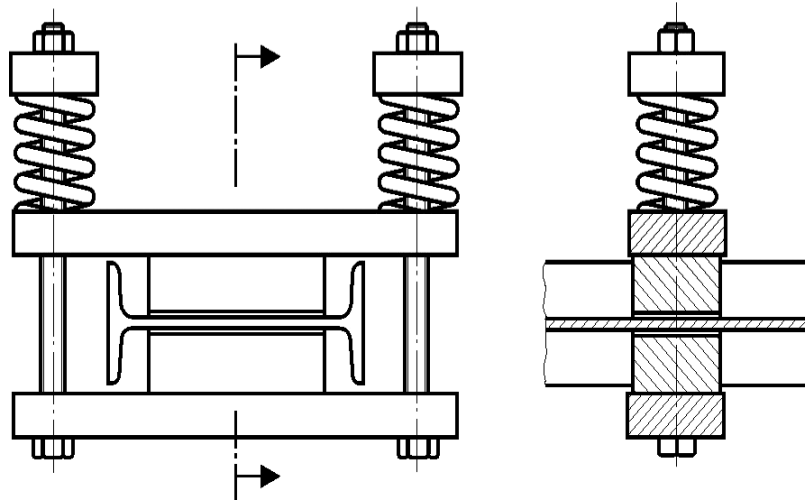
Examples of spring-loaded clamps for SG installation with hot curing adhesives
